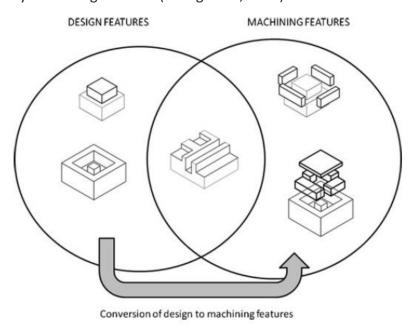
Design and manufacturing (machining) features (Zheng et al., 2012)
